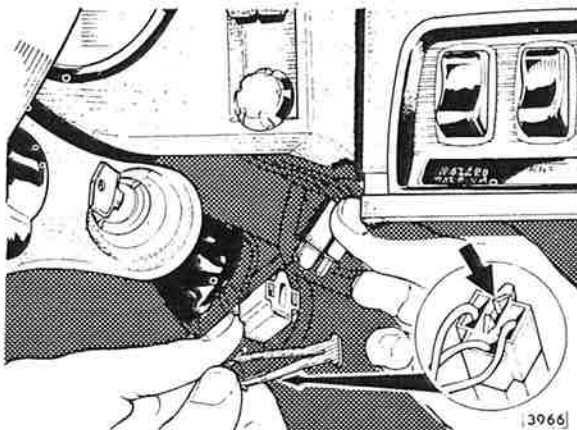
The tachometer plug and socket assembly. (Inset shows the clip in its fitted position).
